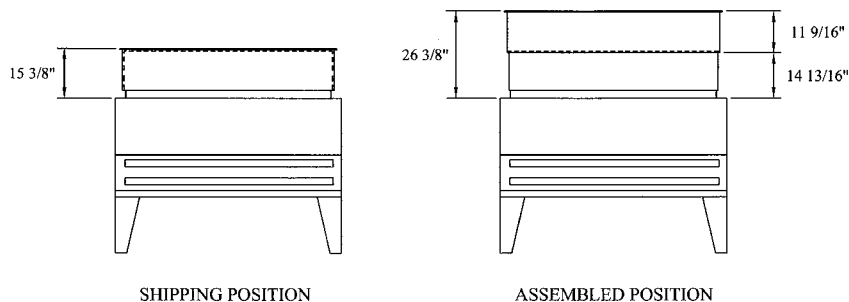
STANDARD 22" & 42" LEG ASSEMBLY
